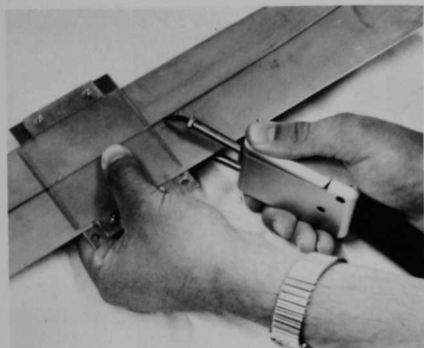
Fixture for Spot Welding Center Spacer Wire to Plate with Tweezer Electrode
